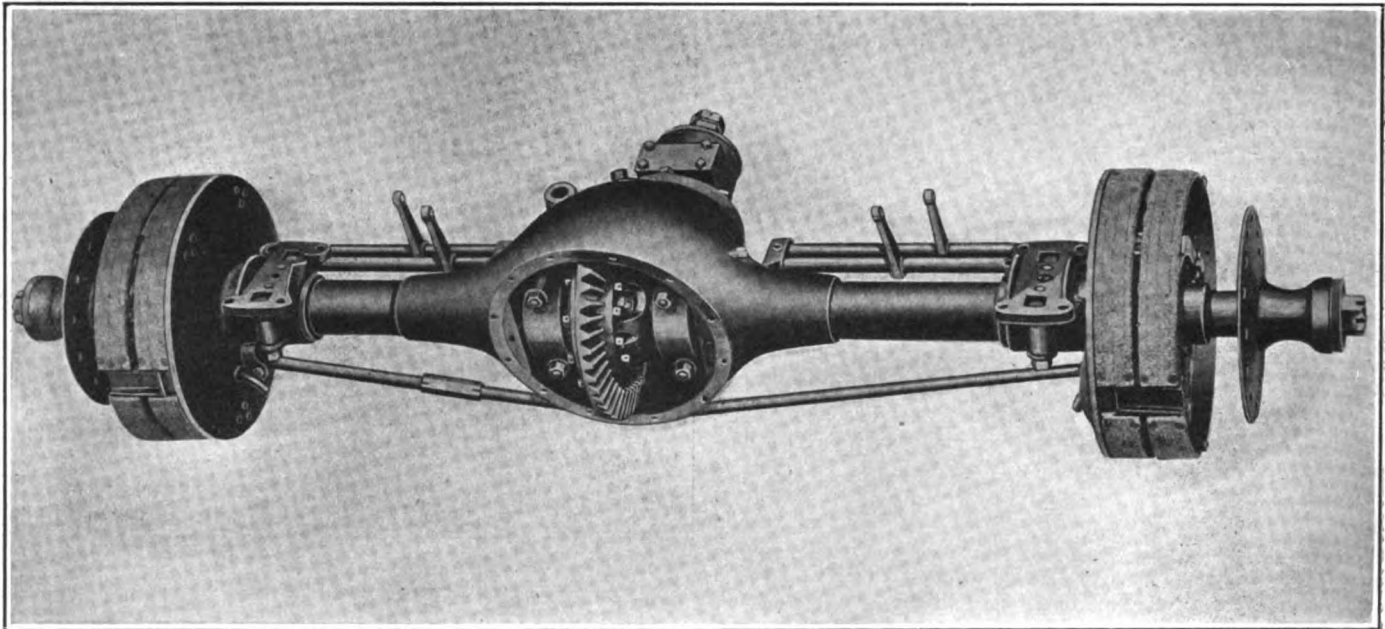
Illustrating the rear axle of the Selden cars with the differential cover removed
